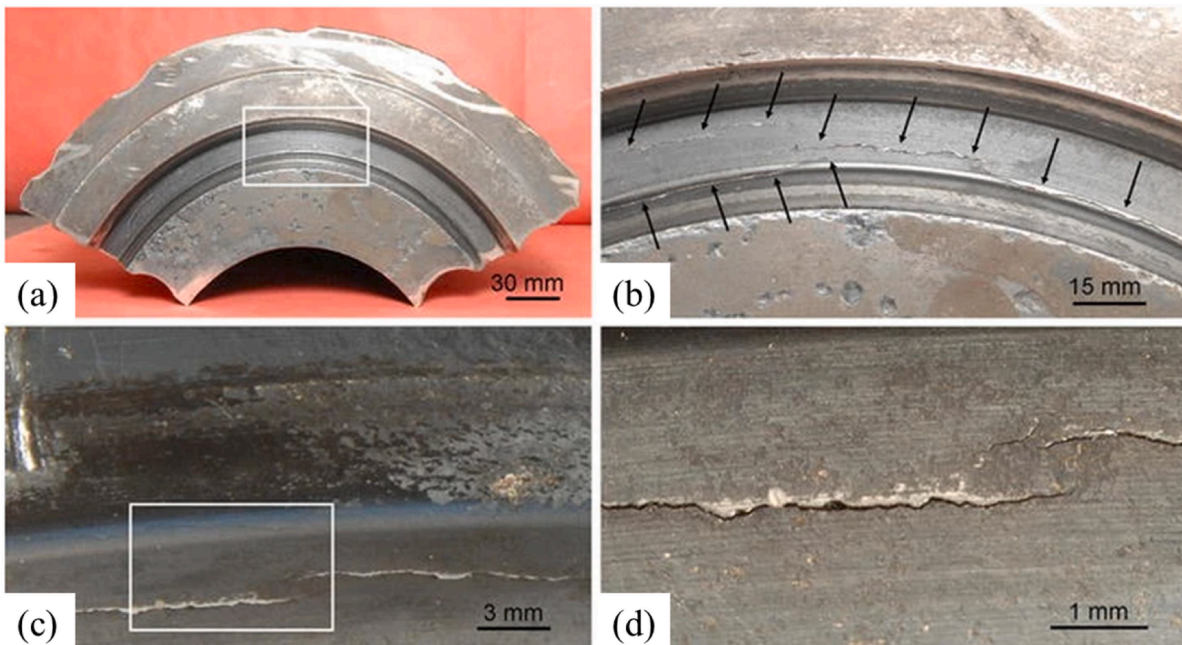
SCC on the flange RTJ (a) An area of the flange RTJ with a crack, (b) a magnified image (a) where multiple cracks are shown, (c) multiple cracks joining together, and (d) a close-up view of (c)³ (Gore et al., 2014).
